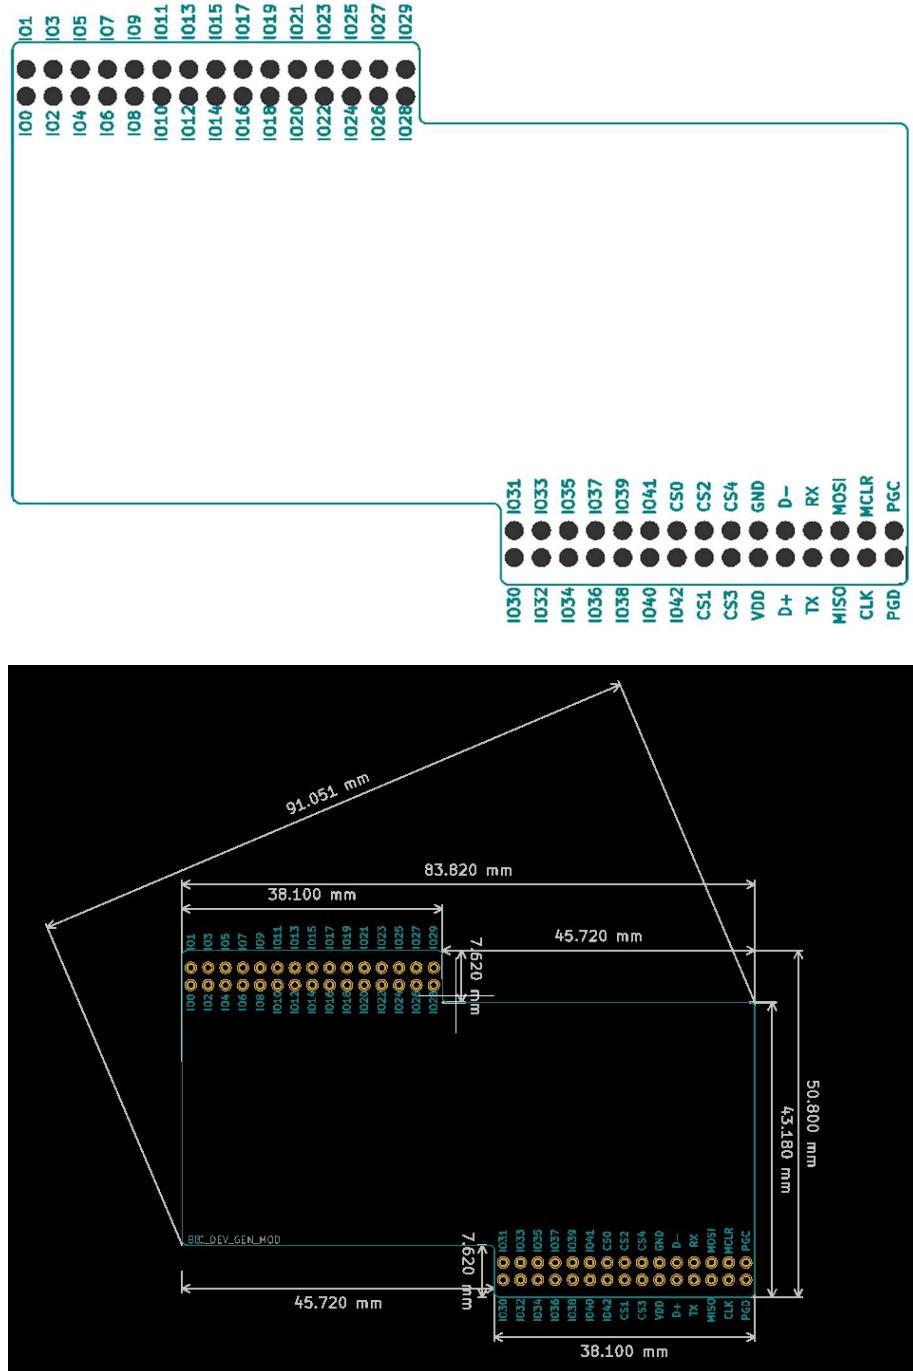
PIC Development Board Daughter Board Standard Drawings
